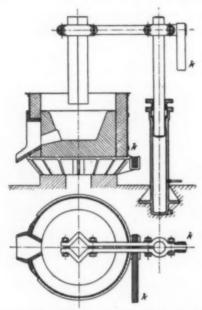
OLDEST MATREI FURNACE. (300 TO 500 KW.)
